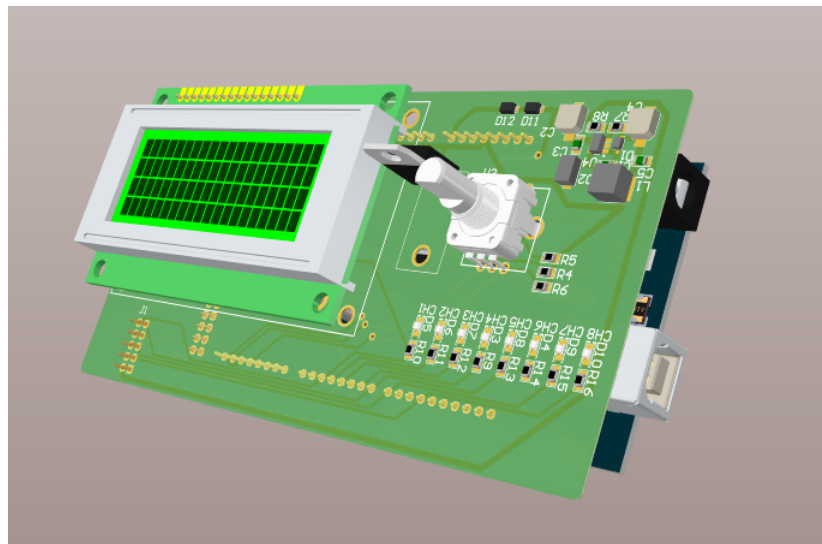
Printed Circuit Board (PCB) 1 top-right view
